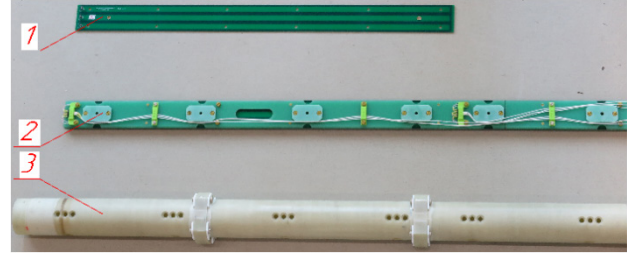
Main part of the MMS: 1. Section of three measuring coils (PCB); 2. Lodgment; 3. Measuring shaft.
